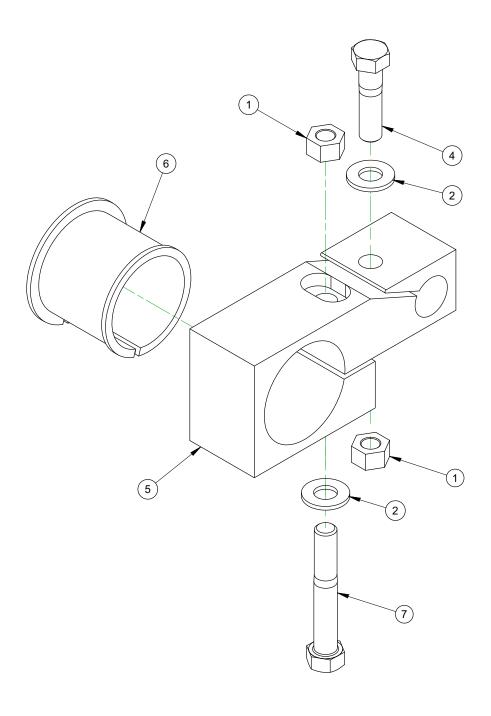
STEP POSITIONER ASSEMBLY (P/N 90590)
